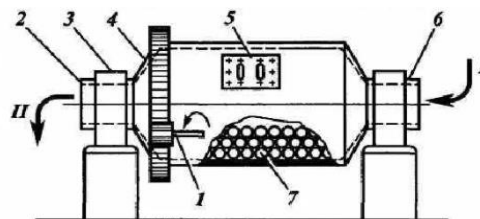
Ball mill: 1-gear drive; 2- hollow discharge trunnion; 3- bearing; 4- drum; 5-hatch; 6-loading hollow trunnion; 7-crushing bodies; I-source material; II-crushed material [1].
